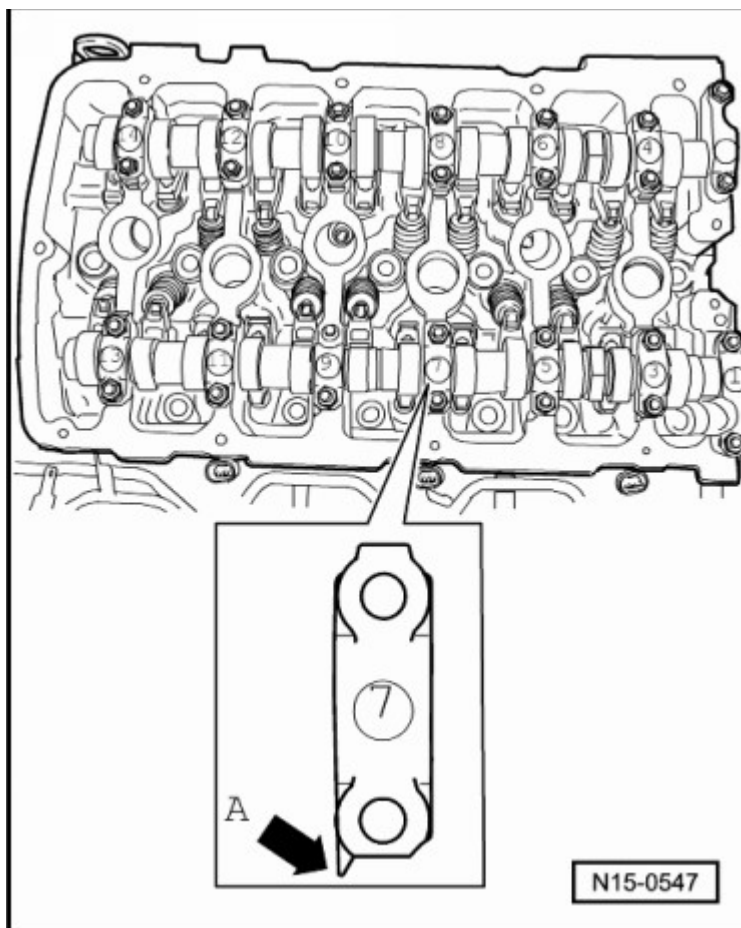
Identifying Points Of Intake And Exhaust Camshaft Bearing Cap Face Outwards
